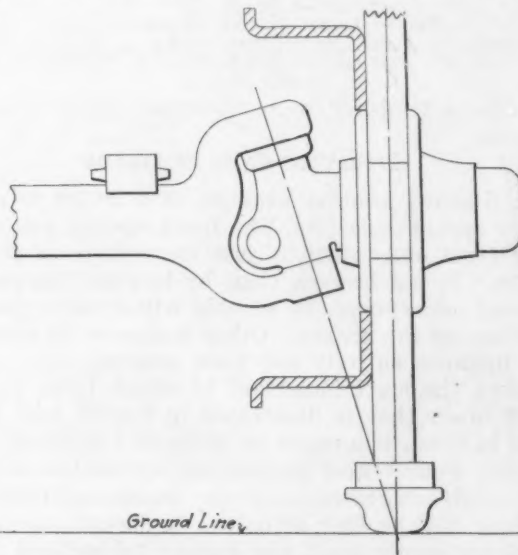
FRONT-AXLE CONSTRUCTION NOW USED ON CARS HAVING FOUR-WHEEL BRAKES
